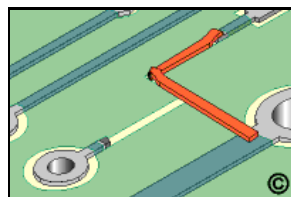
Wide Circuit Tracks may be folded over to produce a sharp bend.
